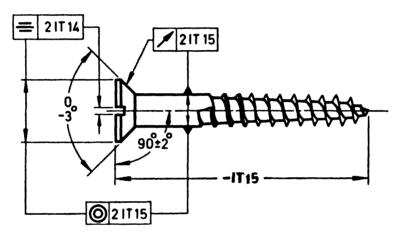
TOLERANCES ON SLOTTED COUNTERSUNK HEAD WOOD SCREWS
